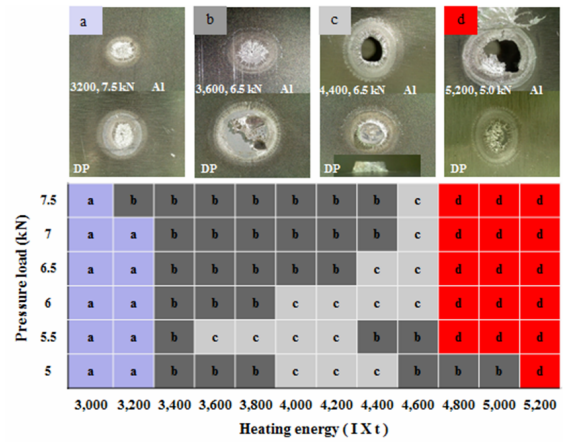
Weldability lobe in Al5052 and DP950 with fracture type: (a) Interfacial fracture; (b) partial interfacial fracture; (c) plug fracture; (d) scattering.
